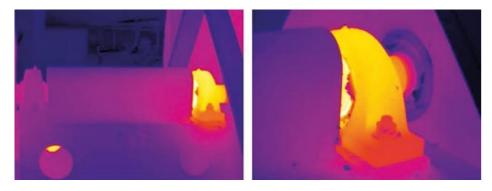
Hot bearing surfaces (ref. https://bulkhandlingtoday.co.za)
